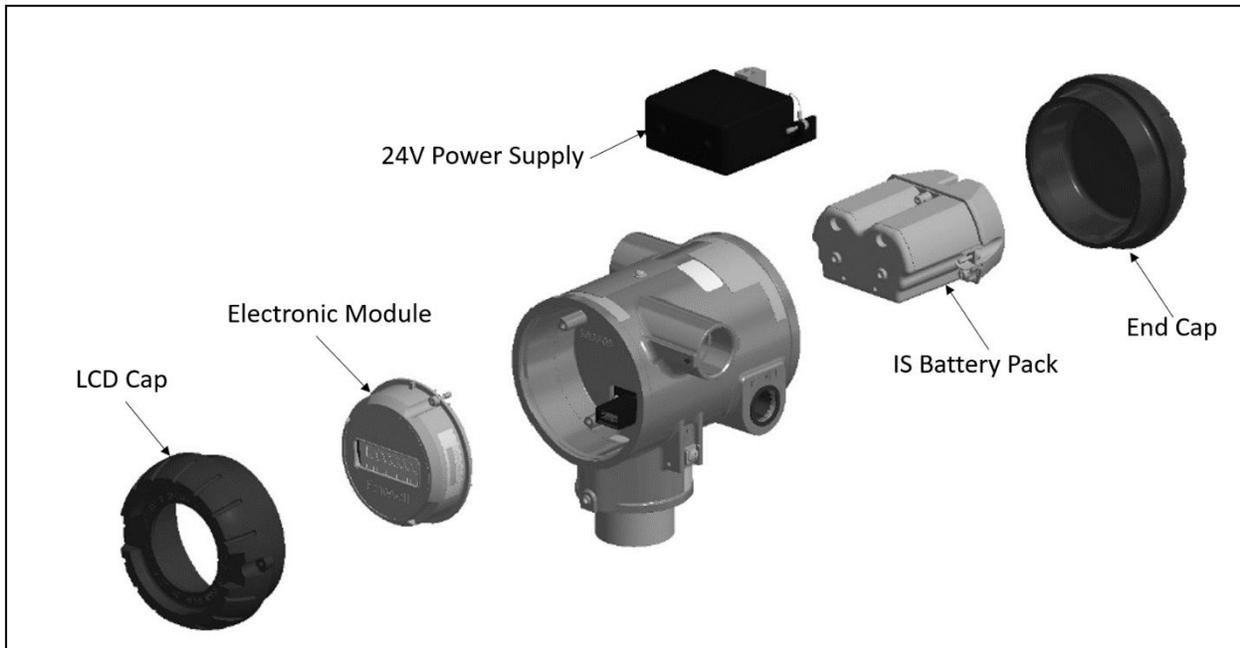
SmartLine Wireless Transmitter Electronics Housing Components
